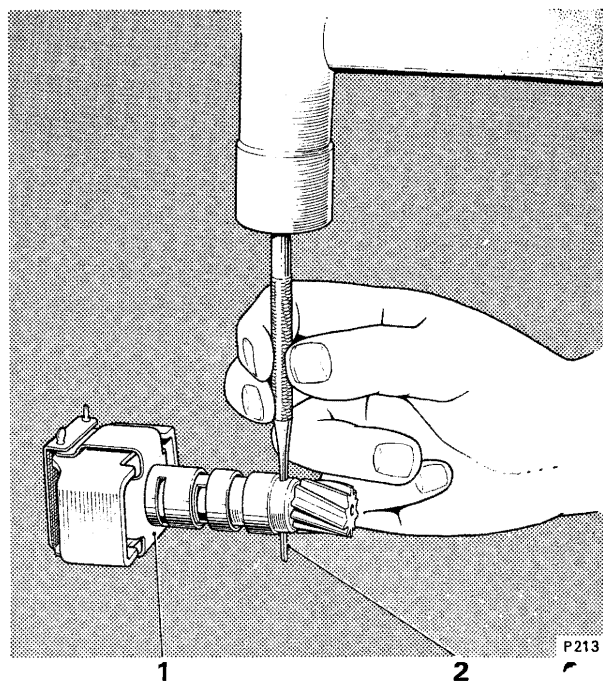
REMOVING GOVERNOR DRIVEN GEAR RETAINING PIN
